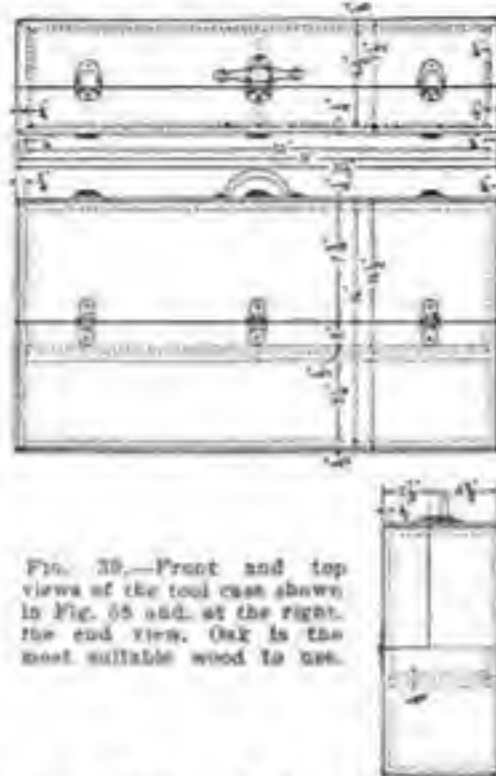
Front and top views of the tool case shown in Fig. 38 and, at the right, the end view. Oak is the most suitable wood to use.
